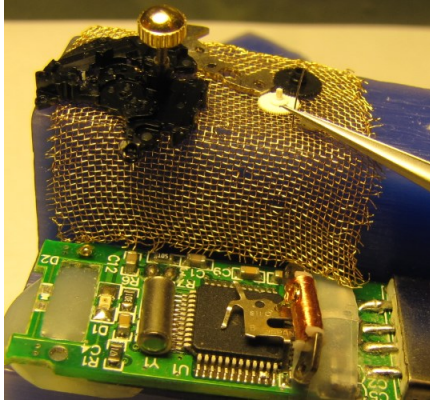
View of a Physical assembly in progress which is a counterpart of the virtual model shown in figure 6
